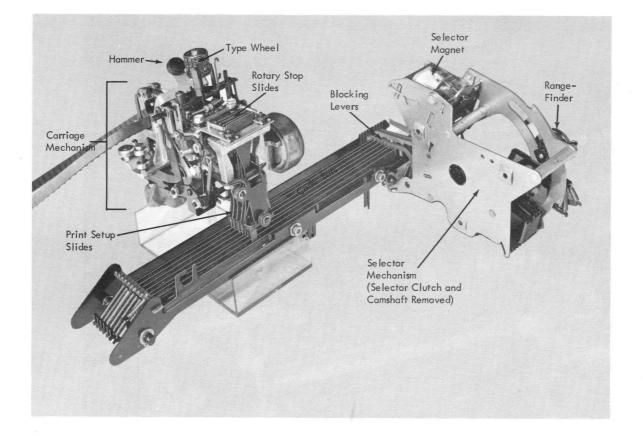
Carriage-Codebars-Selector Mechanism (Removed from ASR 32)
